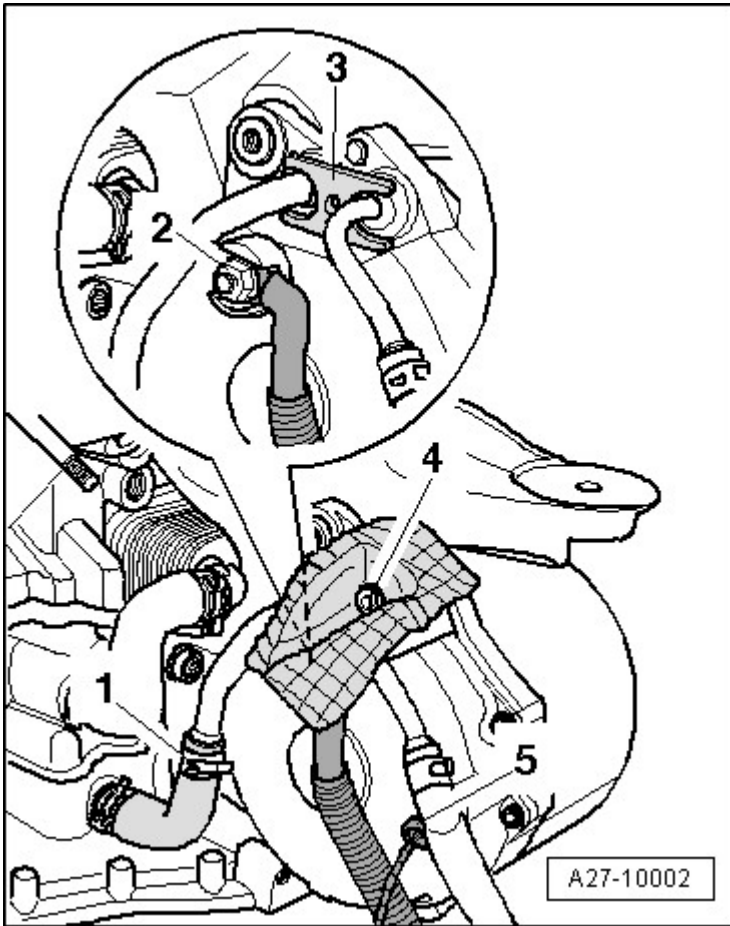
Identifying Coolant Hose, Electrical Connector, Bolt & Heat Shield
